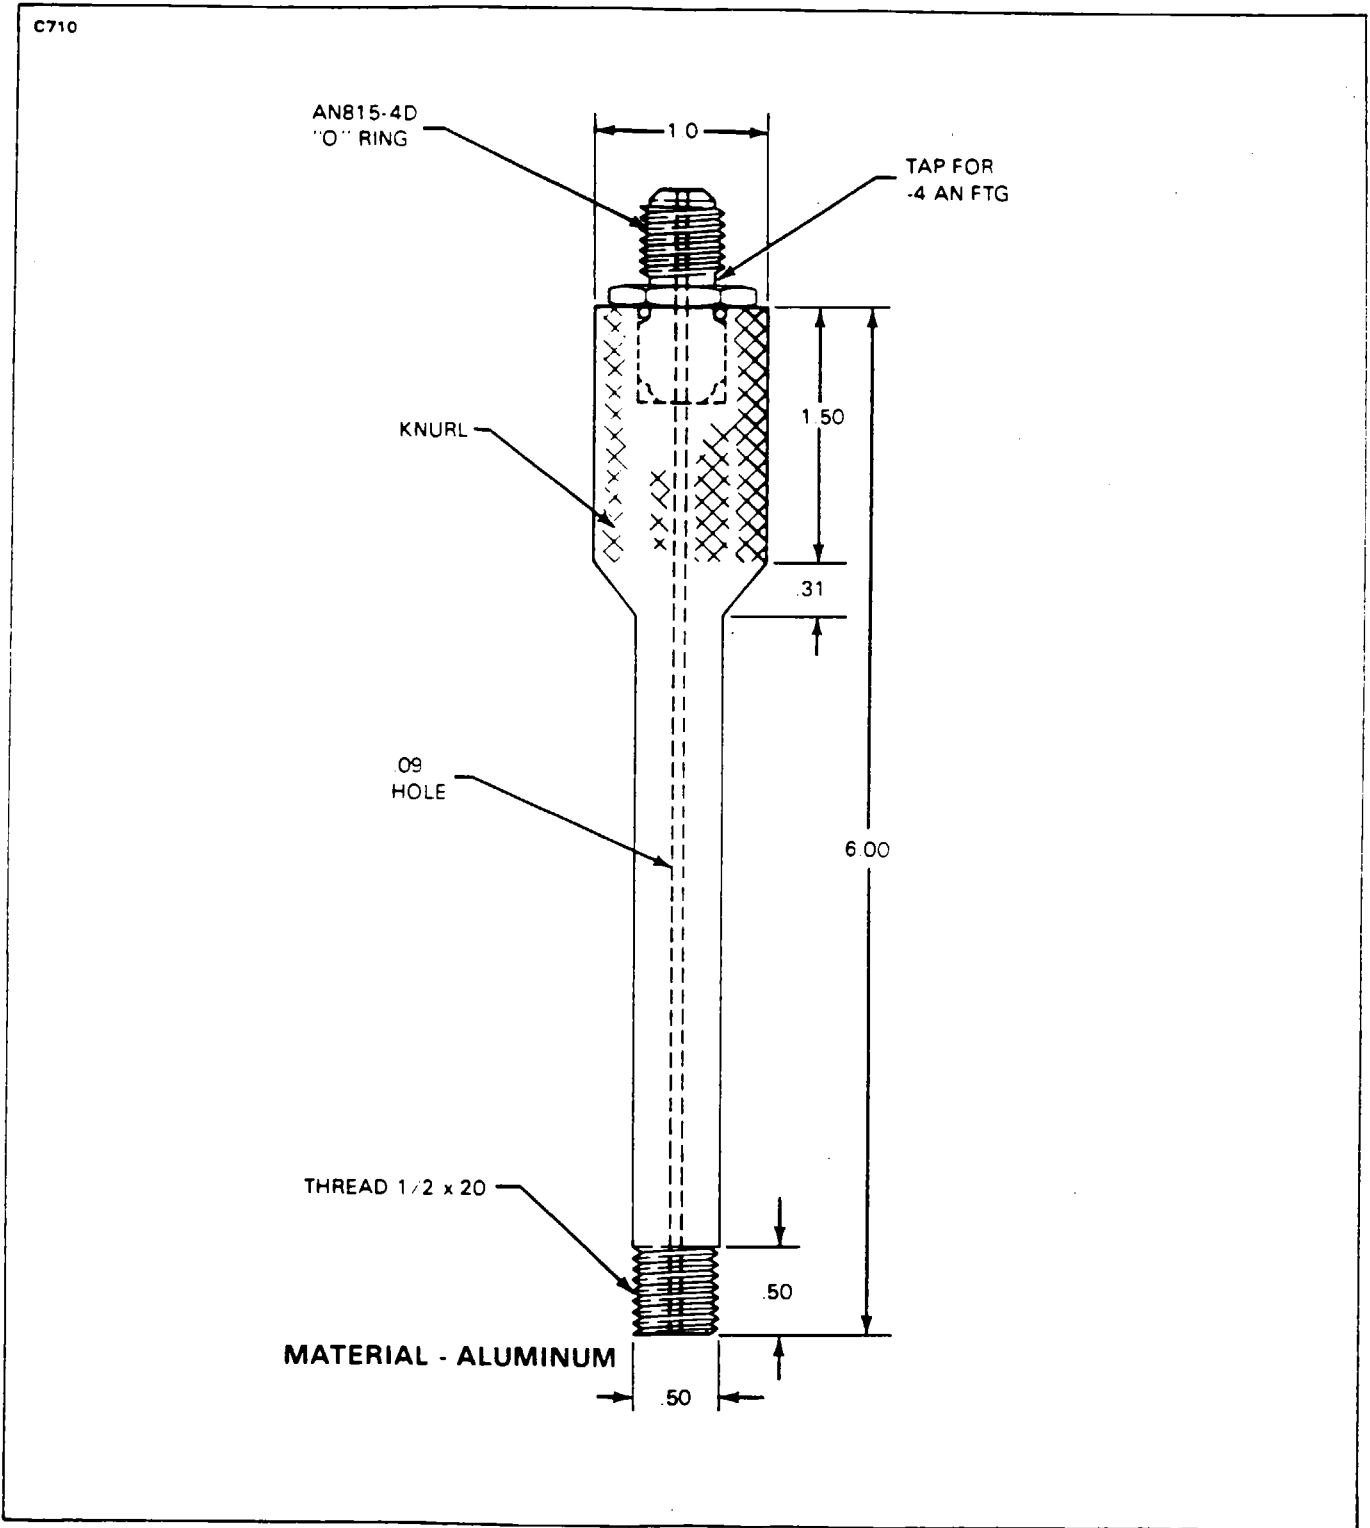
Fabricated Test Fitting. Emergency Gear Extension System
